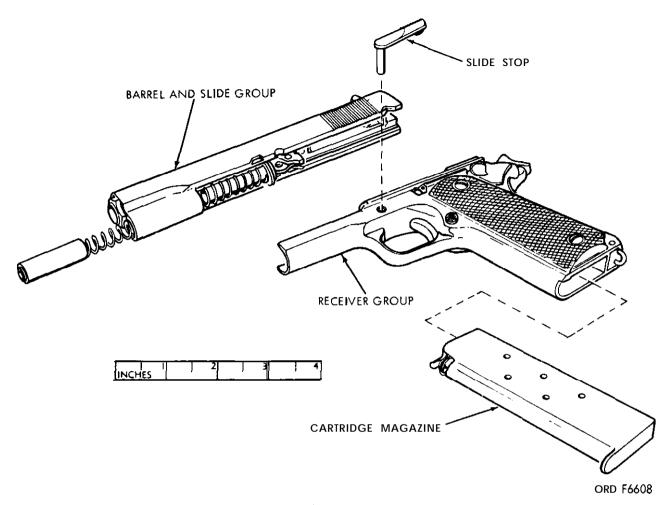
Caliber .45 automatic pistol M1911A1 - exploded view.
